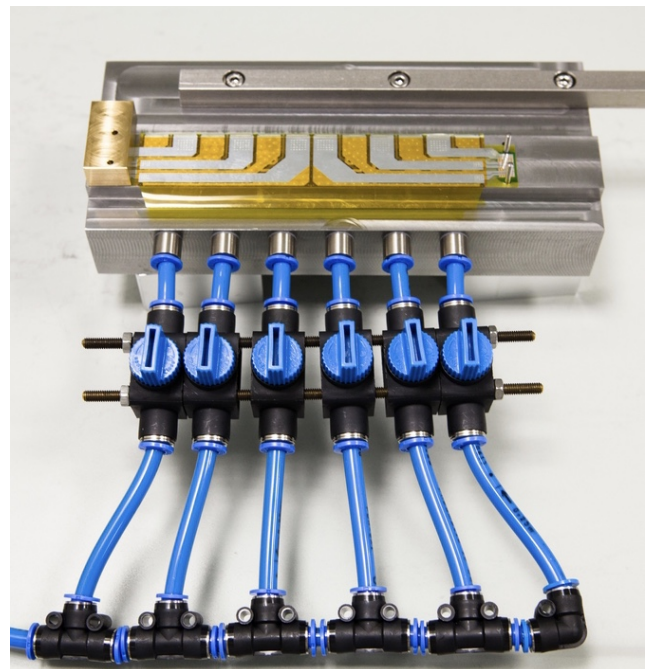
Prototype ladder for the inner pixel layers after gluing on mounting tool.
